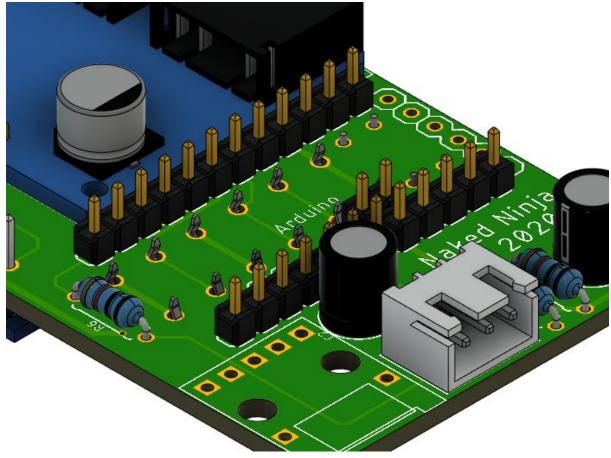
Angle back view of VU Stick V1.2 PCB with male headers
